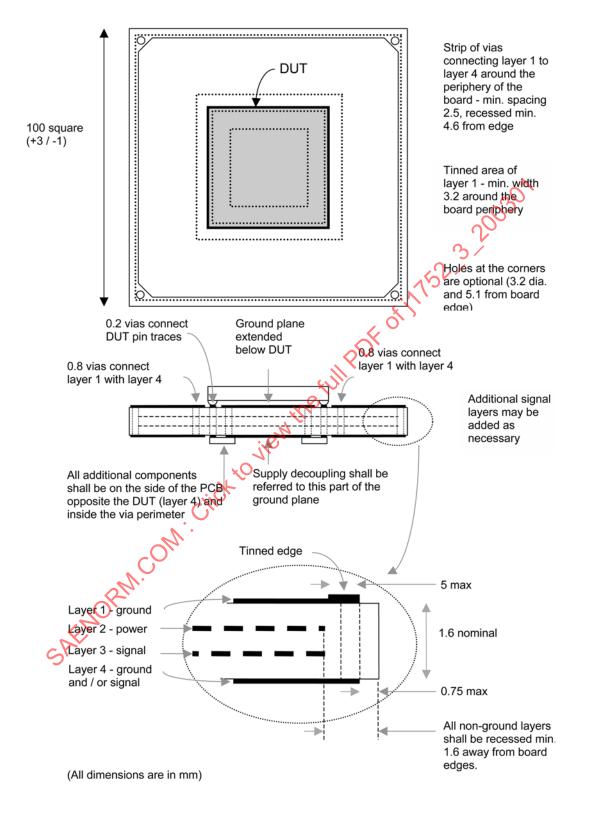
IC TEST PRINTED CIRCUIT BOARD
